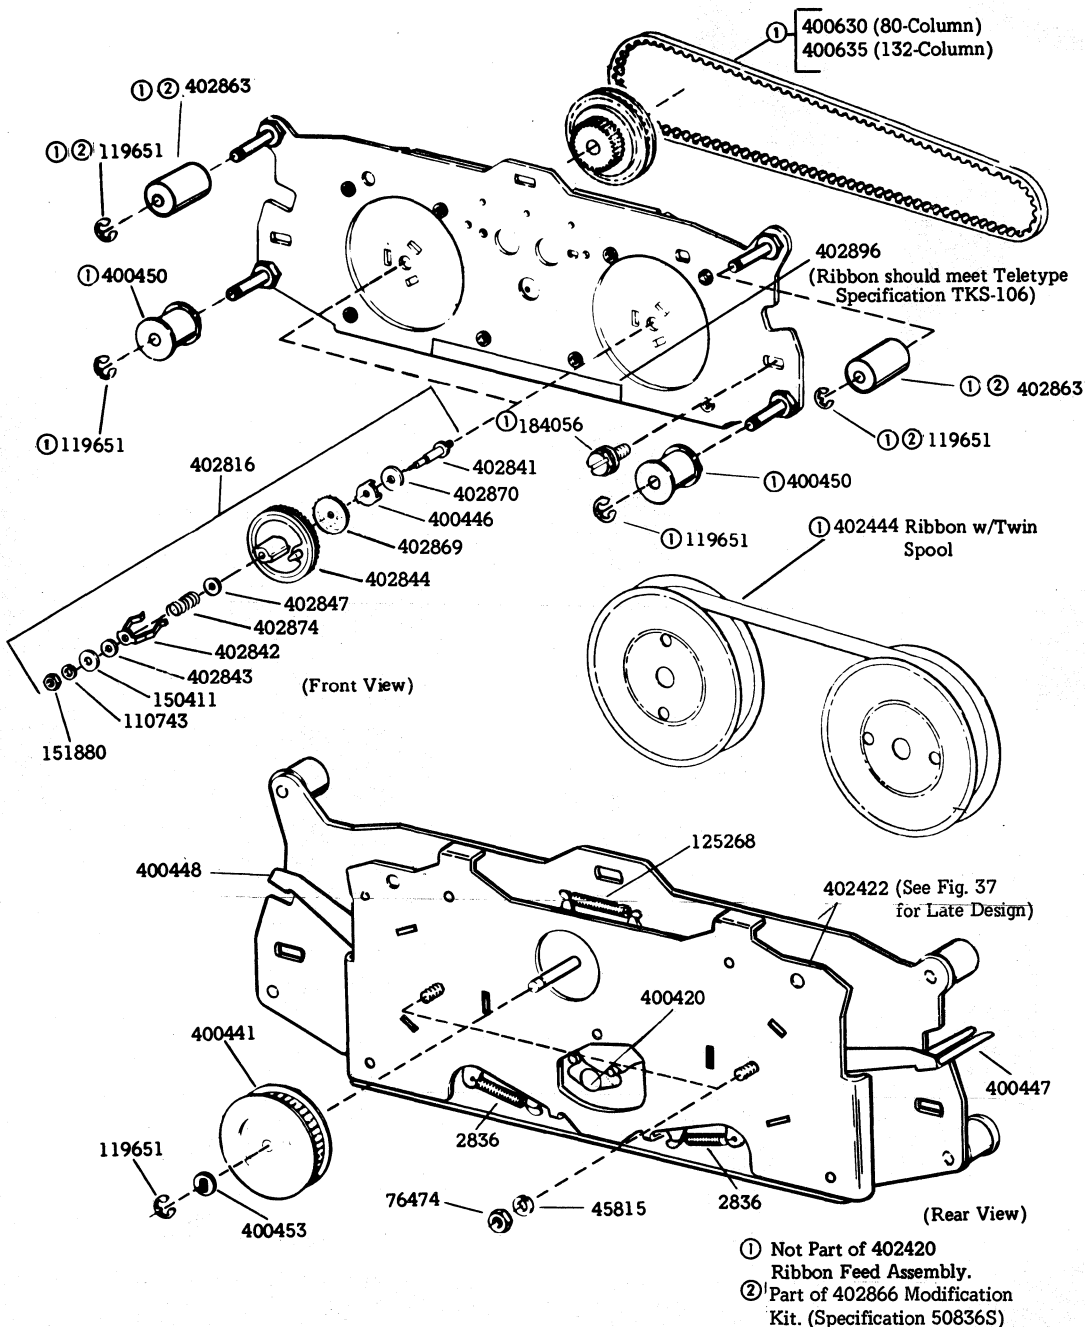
Ribbon Feed Assembly (Tractor Feed - 80 and 132-Column)
